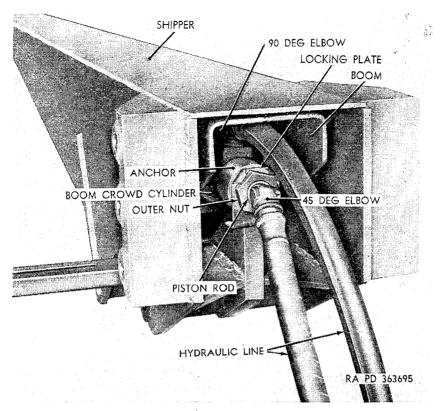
Rear view of boom and shipper assembly with cable drum removed M62.
